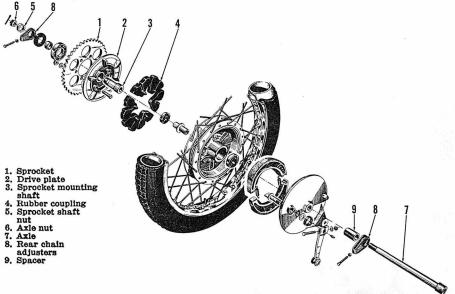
On some models, the rear wheel can be removed without disturbing rear sprocket (1). Lugs on drive plate (2) fit into coupling (4) in wheel.
